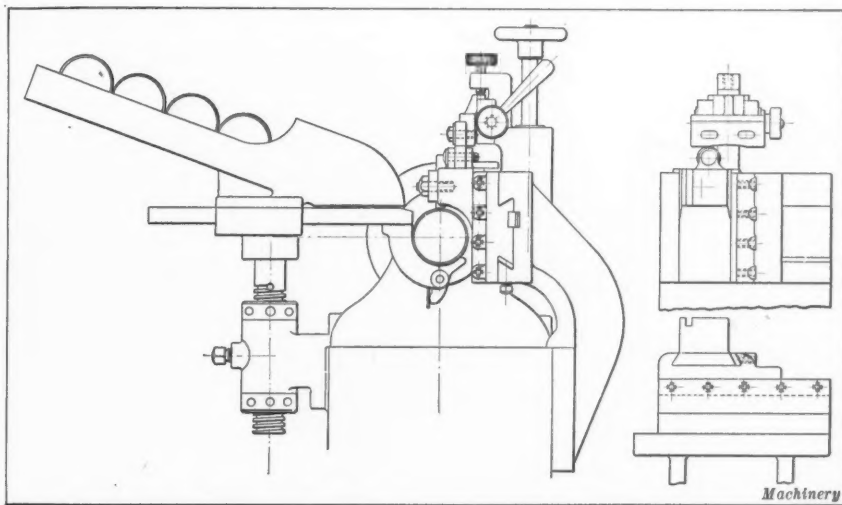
Partial End View of Machine, showing Arrangement of Feed Chute to deliver Castings to Machine
